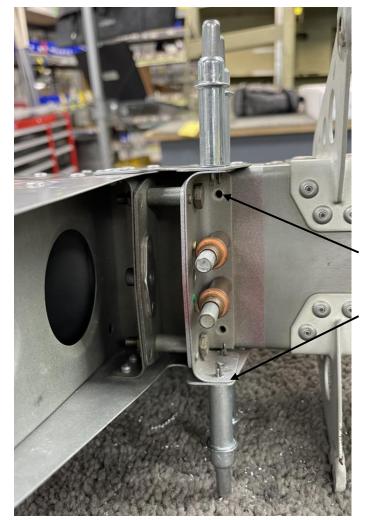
INBOARD HINGE BRACKET ASSEMBLIES
